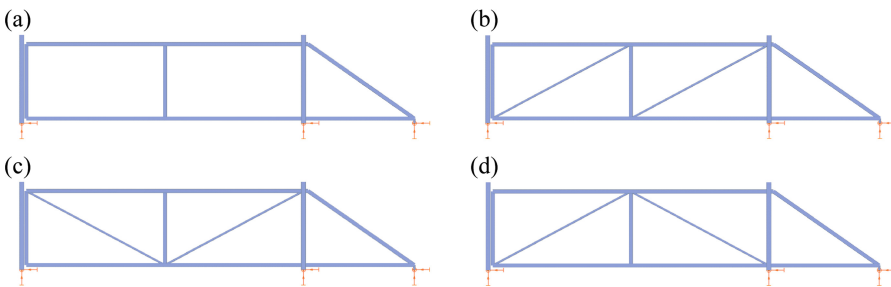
View of the structure of 6 m wide industrial sliding gate: (a) frame structure, (b) truss structure type 1, (c) truss structure type 2, (d) truss structure type 3
